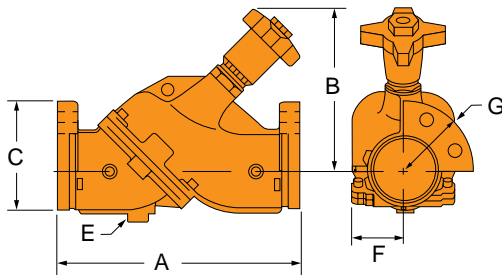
FIGURE GBV-G GROOVED-END STRAIGHT BALANCING VALVES
